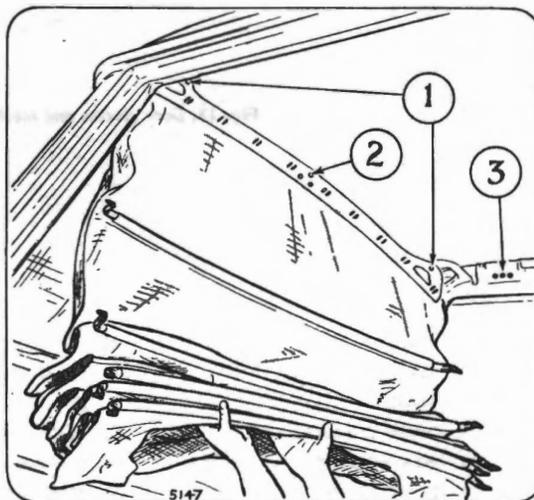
Headlining refitting showing retention of header pad (Rapier)
